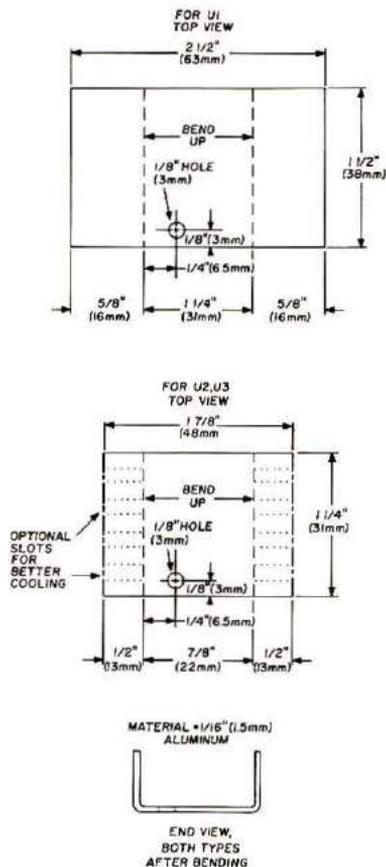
Heat sinks for the regulator ICs can be made from 1/16-inch (1.5mm) aluminum sheet. Drill the holes before bending, and if you choose to cut the extra slots in the heat sink for U2 and U3, do that before bending. Paint the metal a flat black for increased radiation cooling. Use a small amount of thermal conductive grease between the metal tab on the IC and the heat sink. Be sure to turn U3 around (backwards from U2) before fastening it to the sink.
